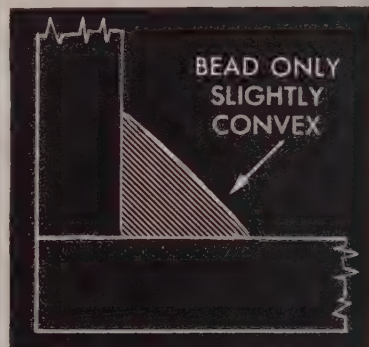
More Mileage comes from "Fleetweld 72's" near-flat bead shape. There is no piling up of weld metal.
